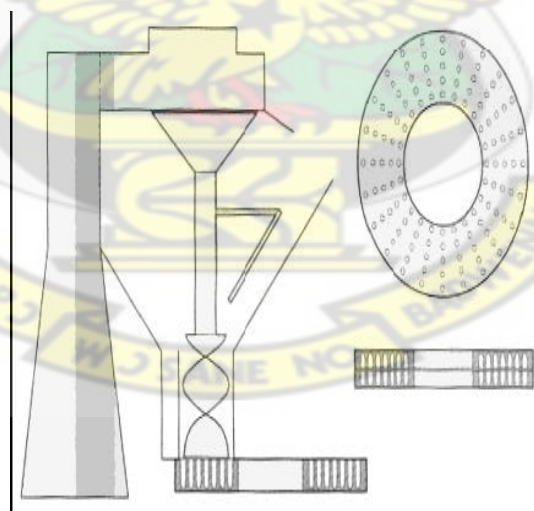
Auger capsule filling machine using the ring system^[33]
